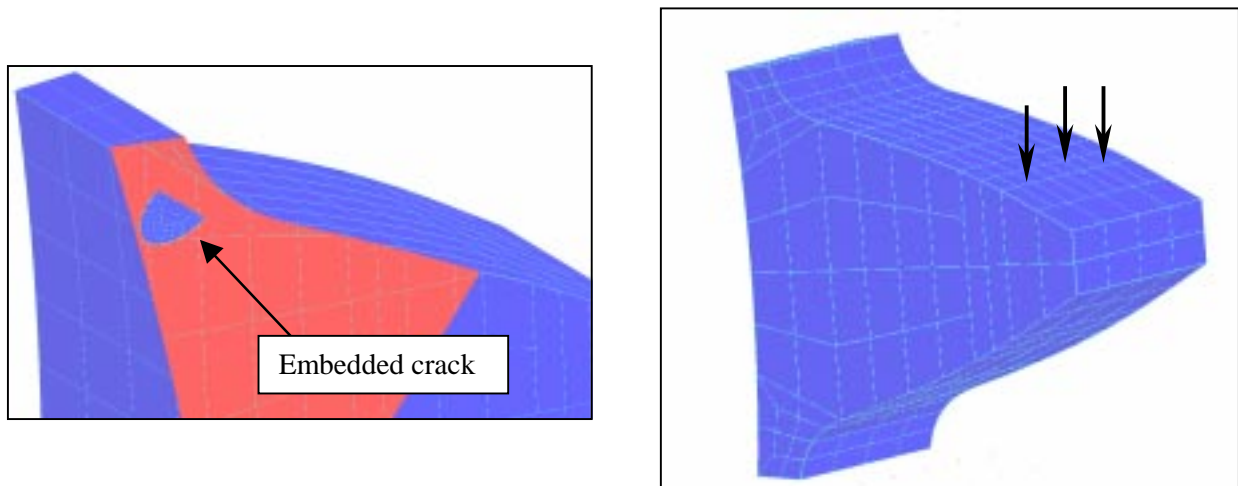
Boundary element model of titanium gear tooth. Embedded semi-circular crack shown located near root of gear tooth.
